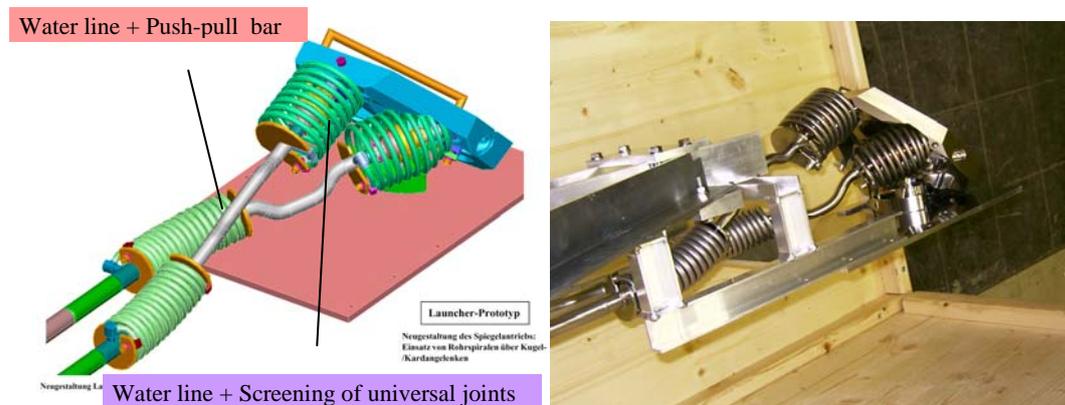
Tube spirals for a flexible cooling water supply of the front steering mirror. Left: CAD. Right: Mechanical realization in the ECRH mock-up launcher.
